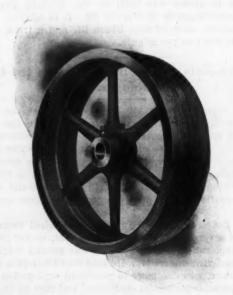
Solid Pulley Bored to Fit the Shaft.
